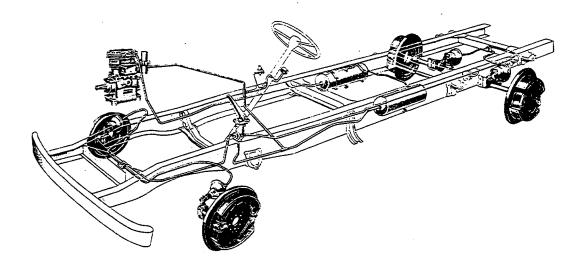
Piping Diagram of Air Brake System With Type E-1 Brake Valve
